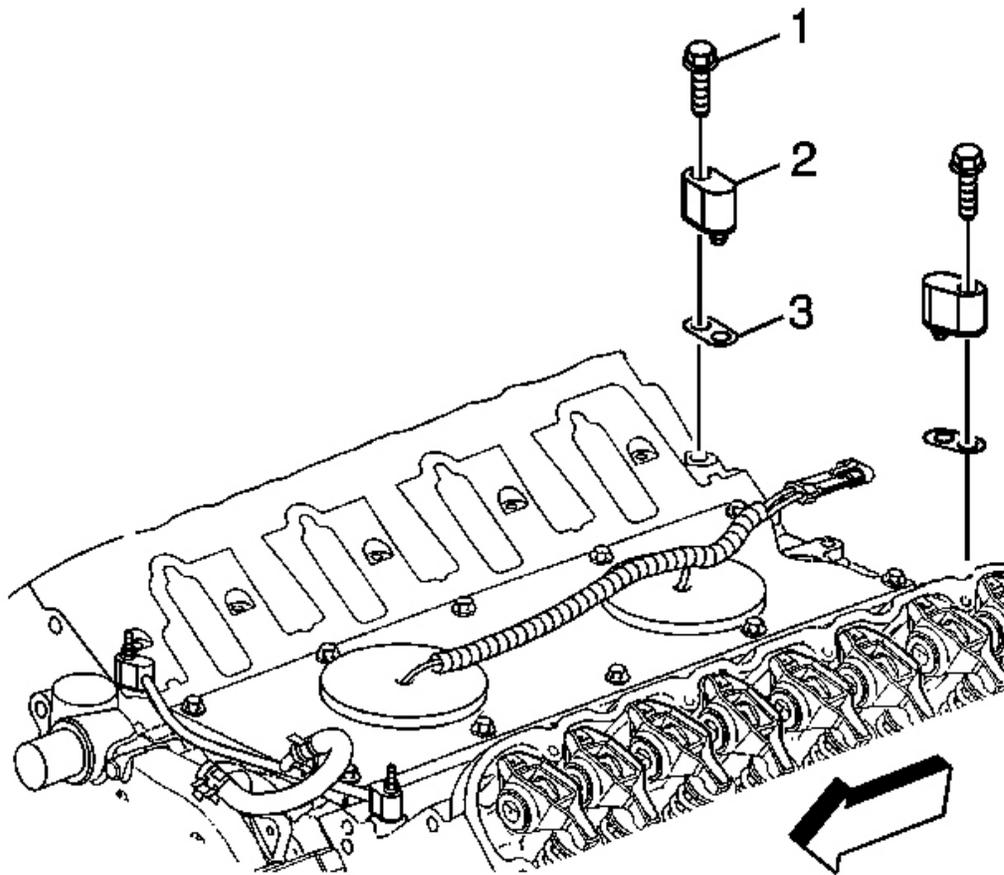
Coolant Air Bleed Pipe Covers, Bolts & Gaskets
